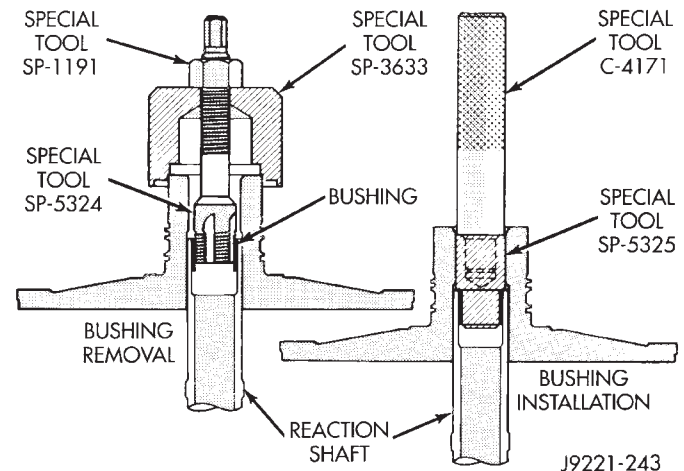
Replacing Reaction Shaft Support Bushing ASSEMBLY
